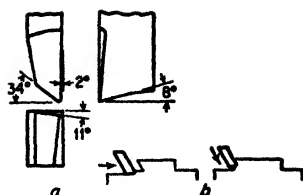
Tool No. 10. (a) Left-hand dovetail end-cutting roughing tool for cast iron; (b) Application of the tool. (*The G. A. Gray Company*)
